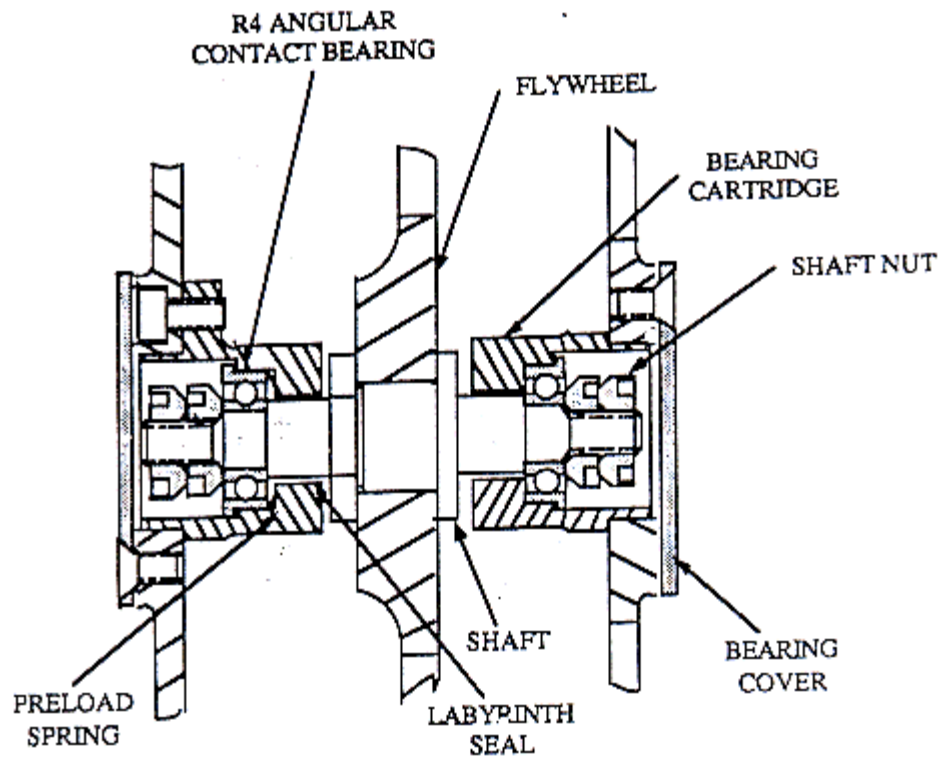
Close up of rotor shaft and mechanical assembly.
